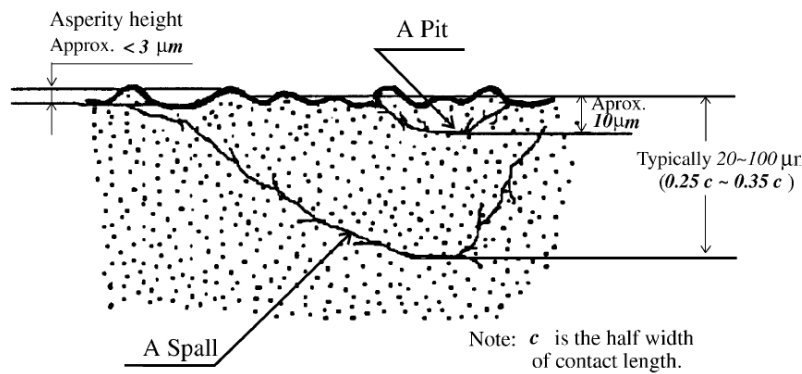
General scheme of pitting and spalling phenomena [4]
